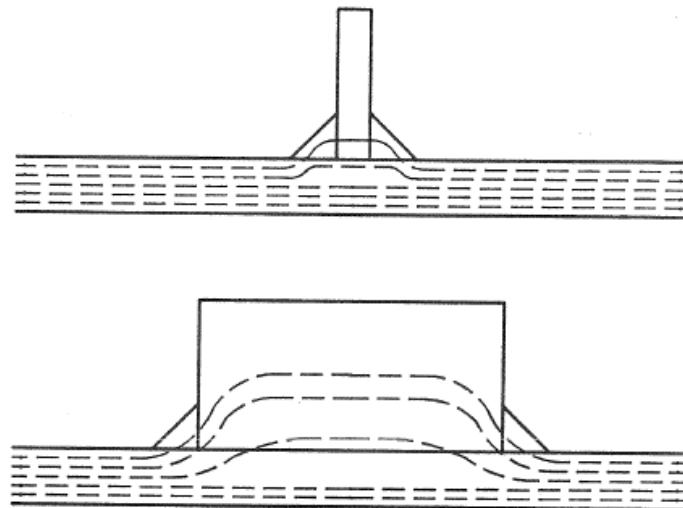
Stress flow lines in fillet-welded attachments.
